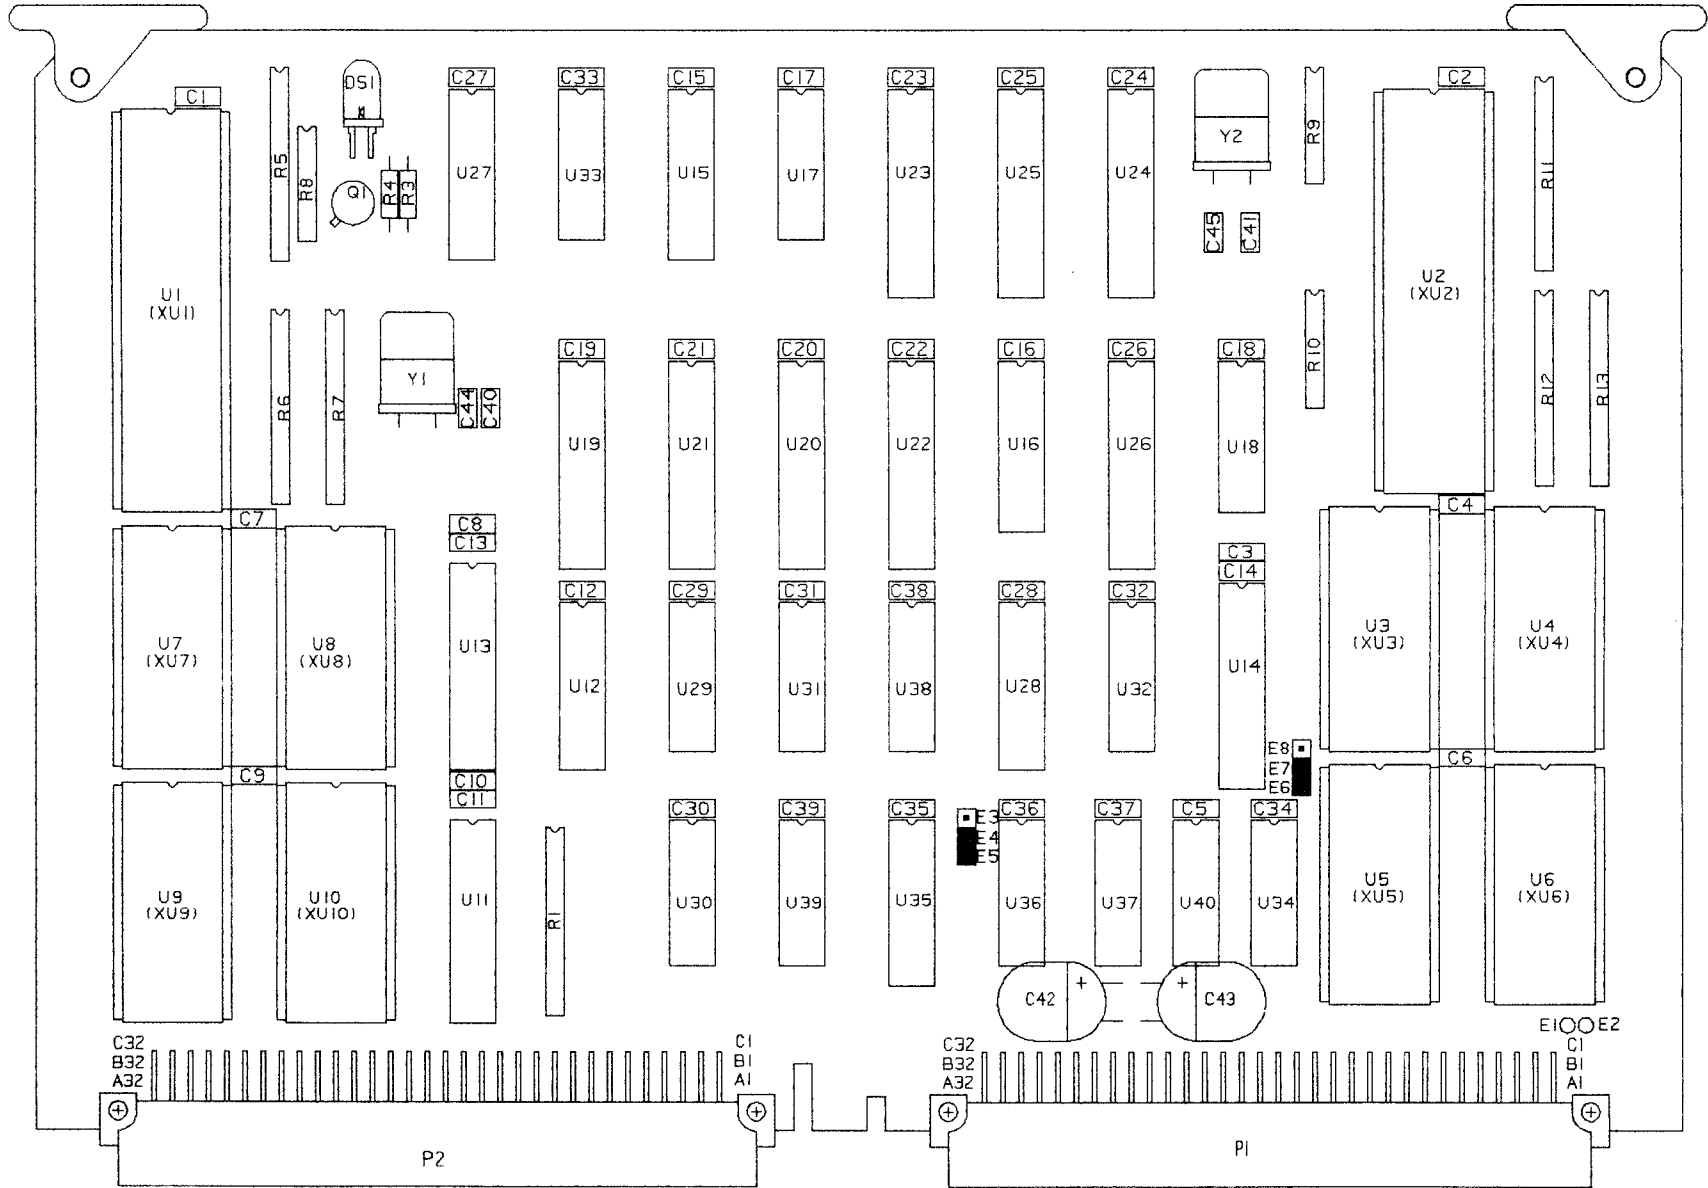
Signal Processor PWB Assembly A2 Component Locations (10133-2200, Rev. E)
